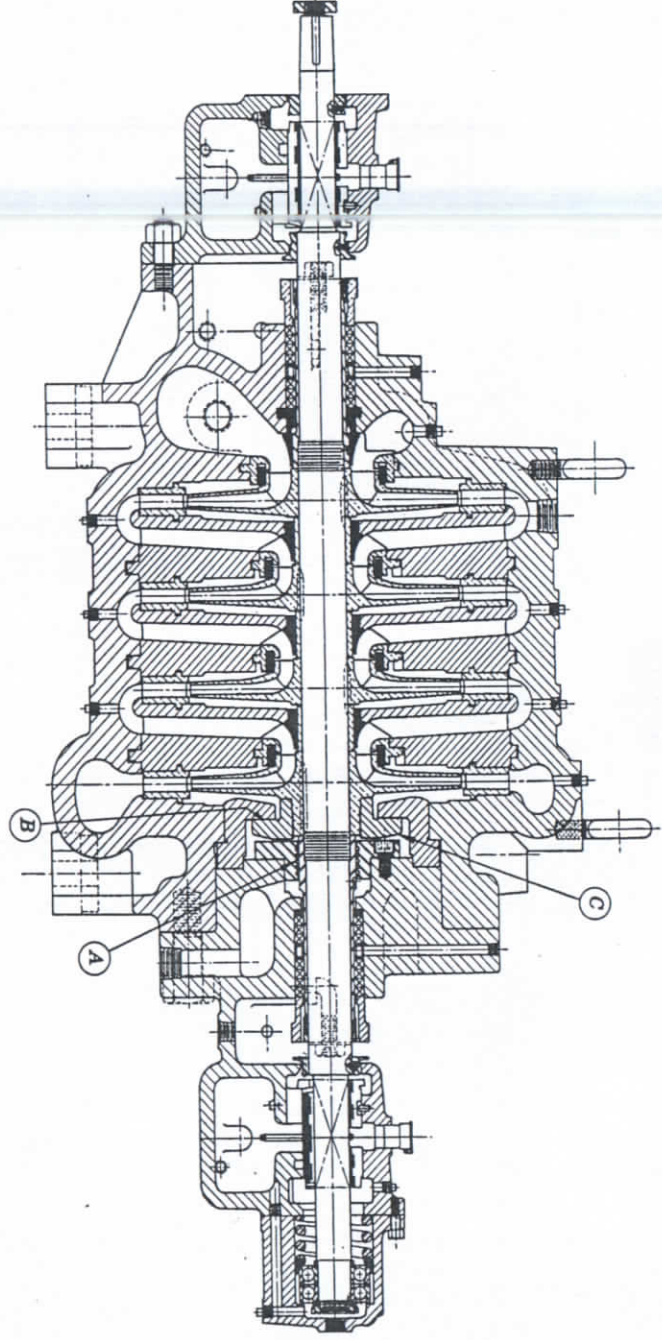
DeLaval boiler feed pump with automatic balancing disk.
